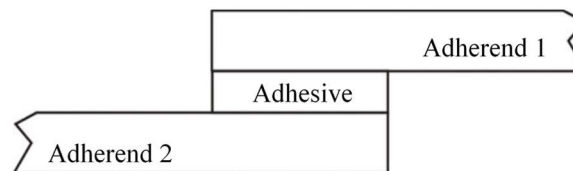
Adhesive joint (adapted from da Silva et al. 2011).
